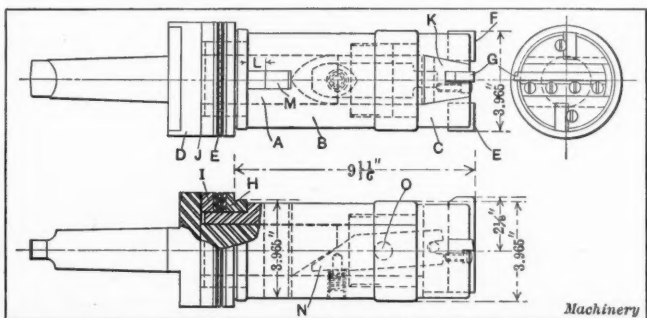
Expanding Type of Tool used for recessing the Top of the Cylinder Bore
